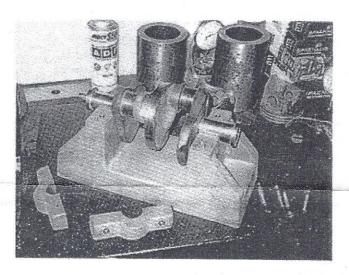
Welded crankshaft before flywheel is fitted.
